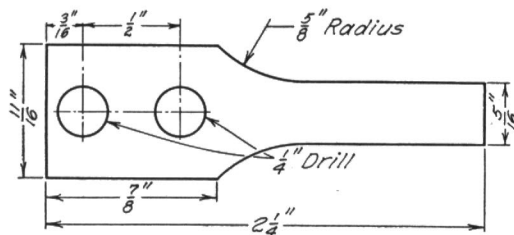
SPECIMEN FOR FATIGUE TESTS OF THIN SHEET METAL
